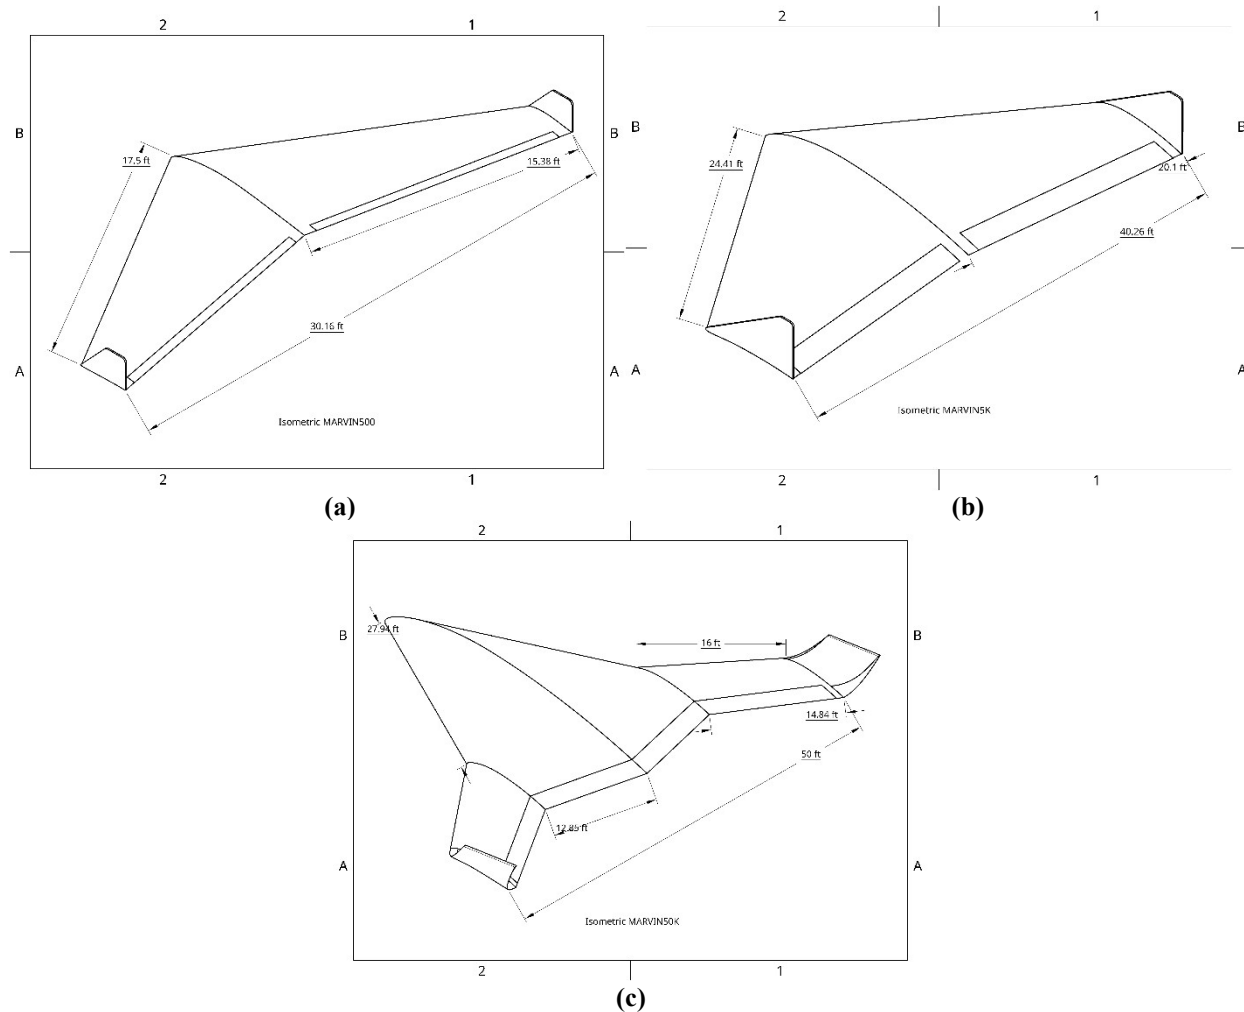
(a) MARVIN500 CAD Drawing, (b) MARVIN5K CAD Drawing, (c) MARVIN50K CAD Drawing
